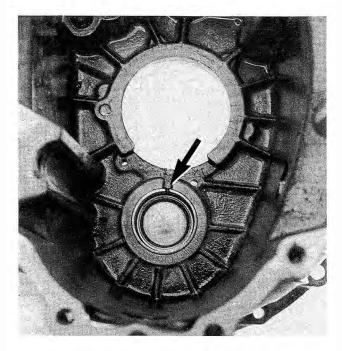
Layshaft bearing shell correctly installed in front case, with oil passage aligned with hole in case (arrow).
